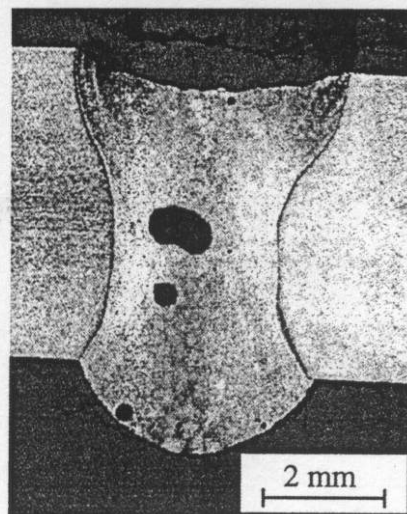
Optical micrograph of alloy 6061 CO_2 LB weld joint showing porosity formation in the weld metal and weld pool collapse (plate thickness is 5 mm) [72].
